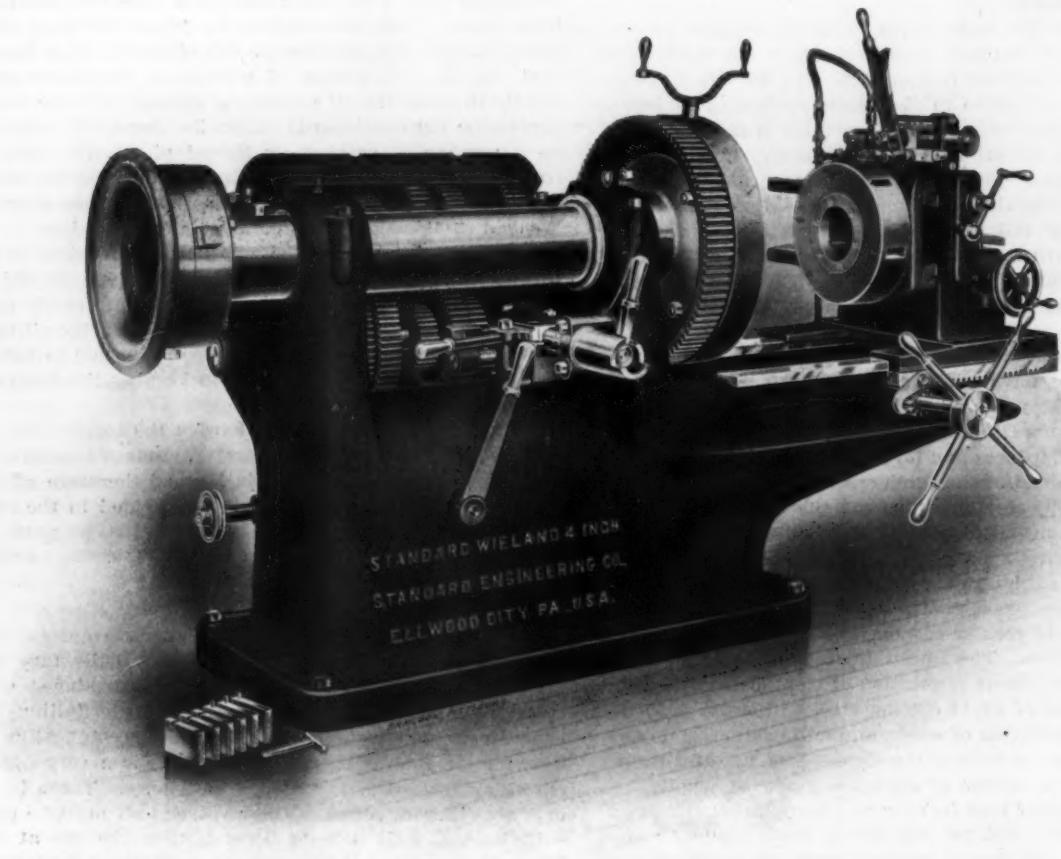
Working Side of the Standard Wieland 4-Inch Pipe Threading and Cutting Machine.
